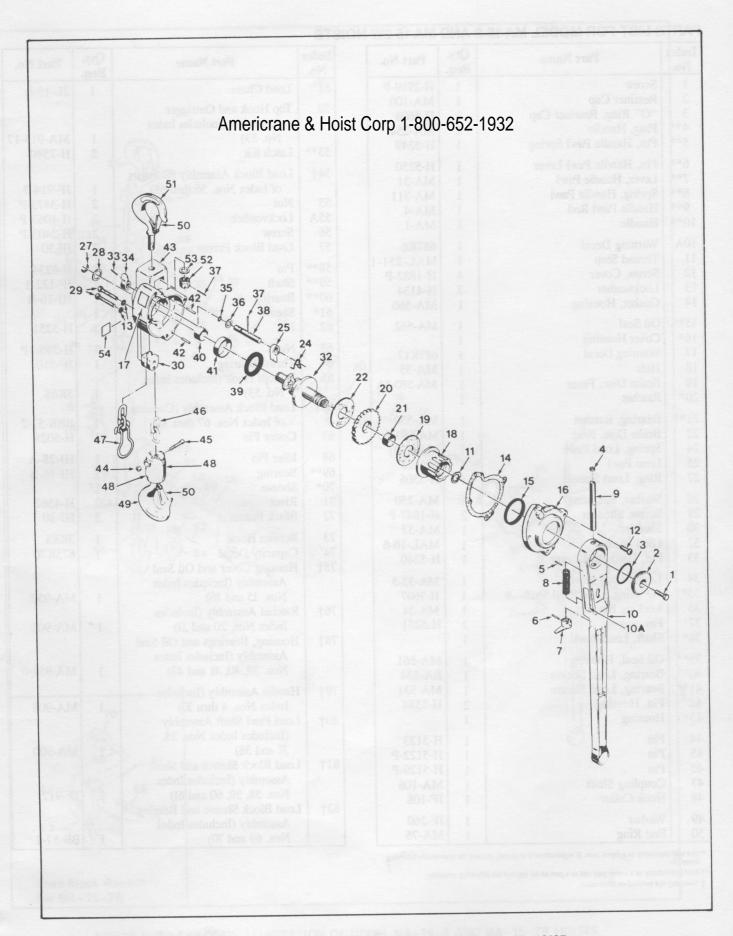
EXPLODED ILLUSTRATION OF MODEL MA-15 HOIST
